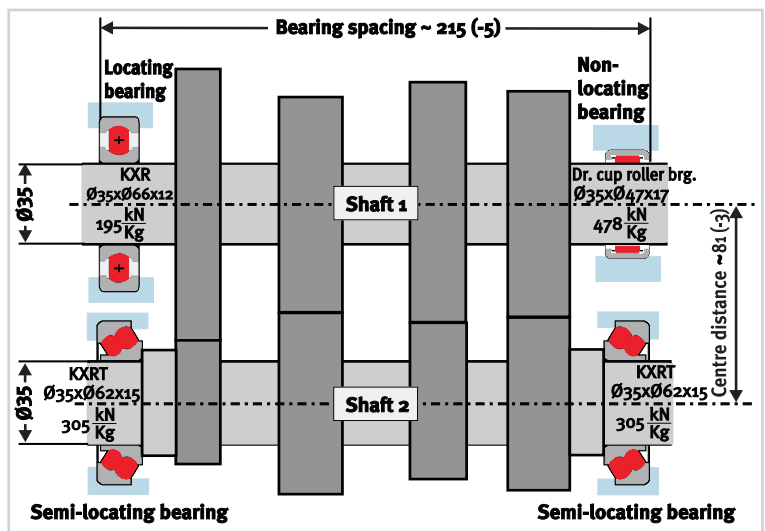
Twin-shaft gearbox with KXR/KXRT bearings
